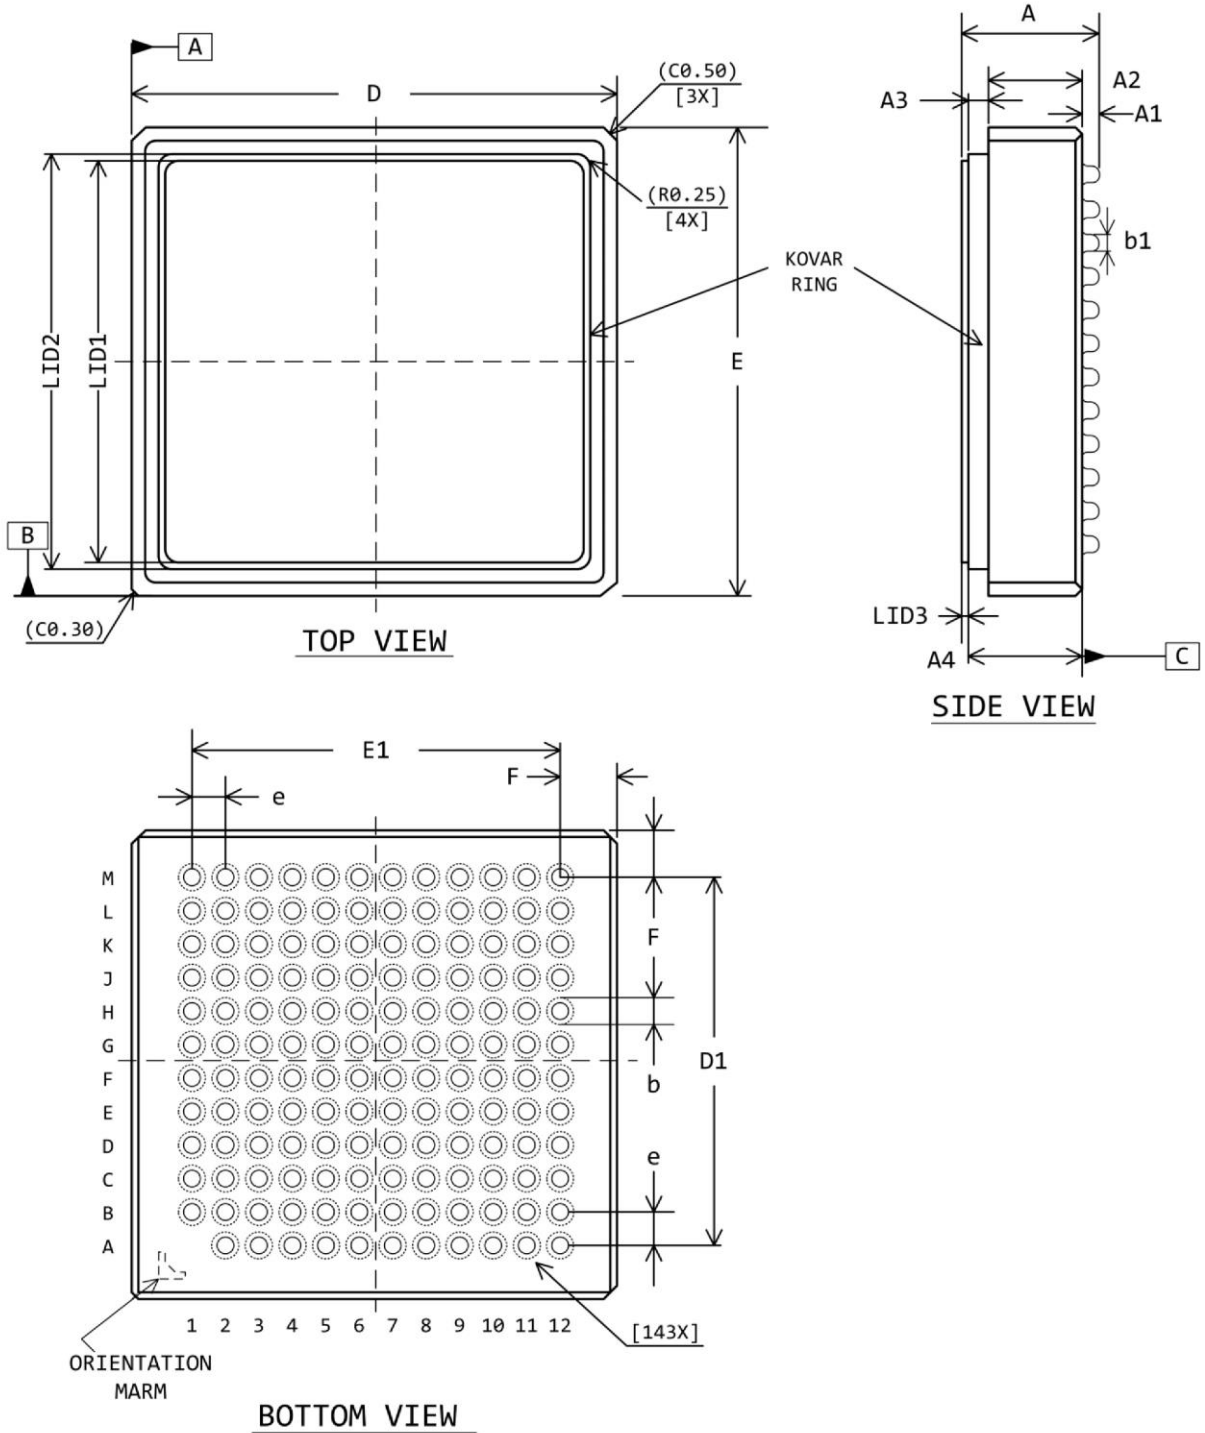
143-Lead Ceramic Ball Grid Array (CBGA)
